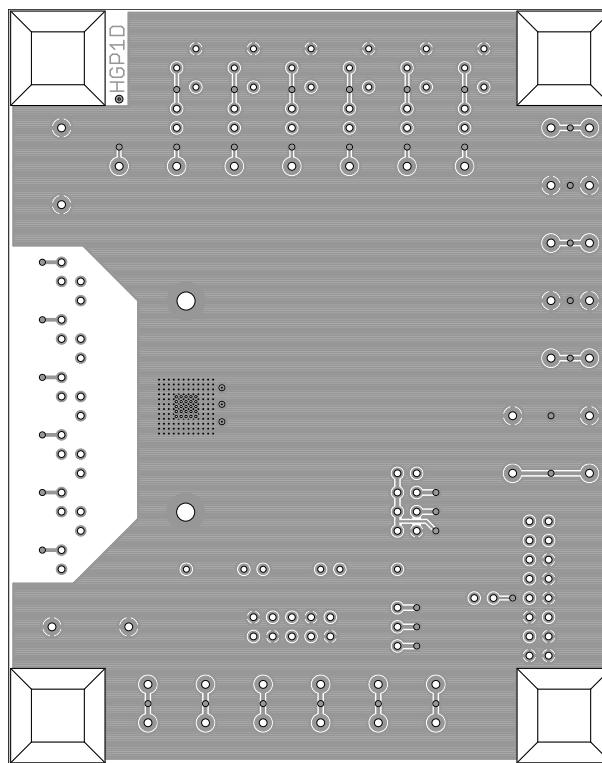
Evaluation board (solder side) with mounting option for heat sink
